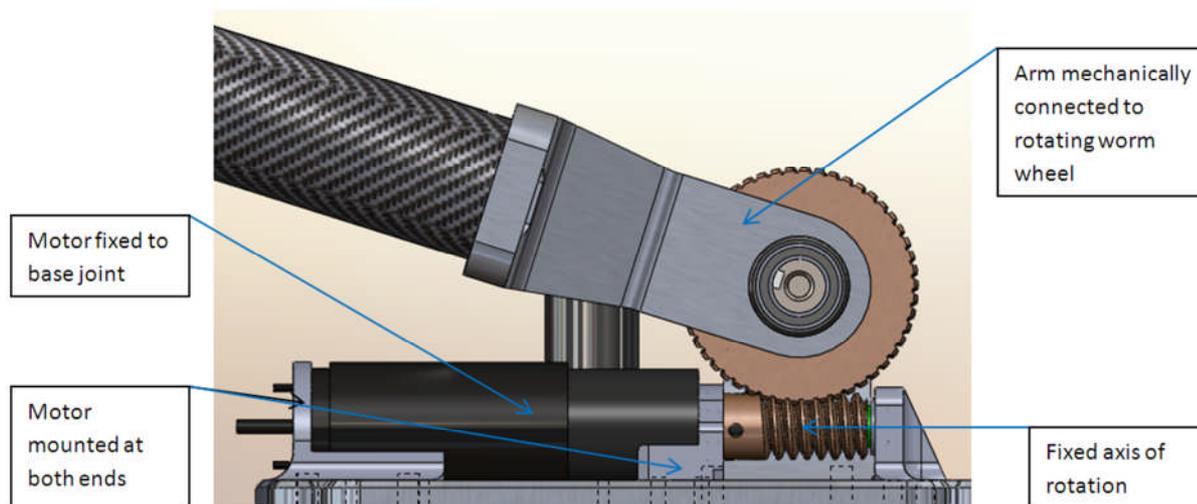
Shoulder Joint Motor Positioning and Accurate Meshing of Teeth
